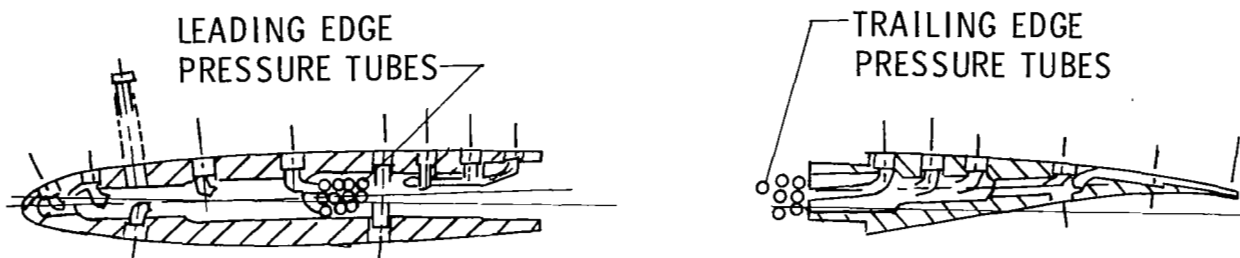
Pathfinder I wing sections (rough machined and instrumented).
